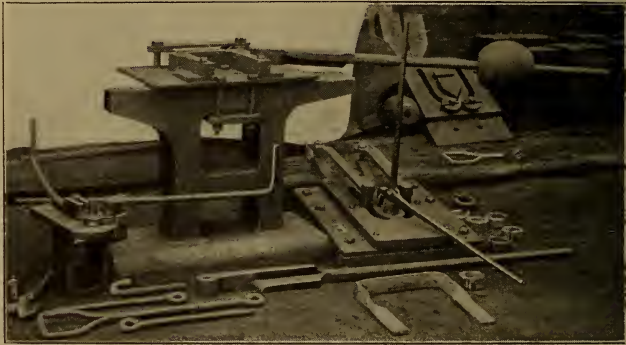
TOOLS FOR BENDING STEPS, EYEBOLTS, ETC.
